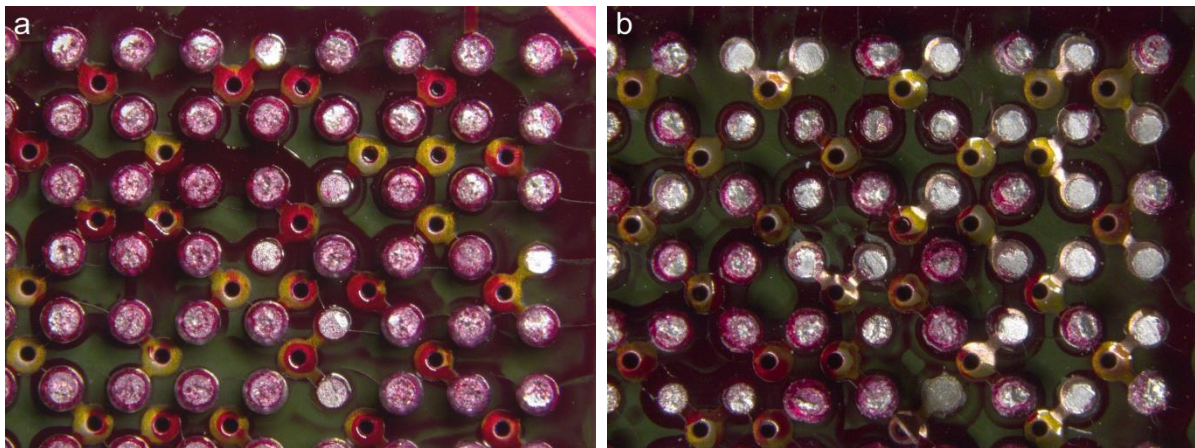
Images of dye penetrant analysed BGA676 with a) SnPb solder joints and b) SAC305 solder joints. The components were mounted on test boards that were aged prior to the thermal cycling.
